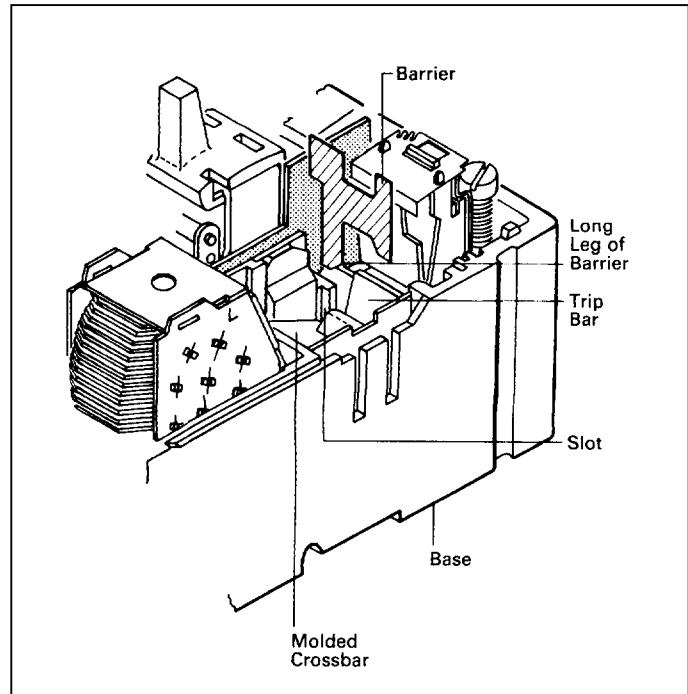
Barrier Installation Position (Left Accessory Mounting Cavity Shown)
